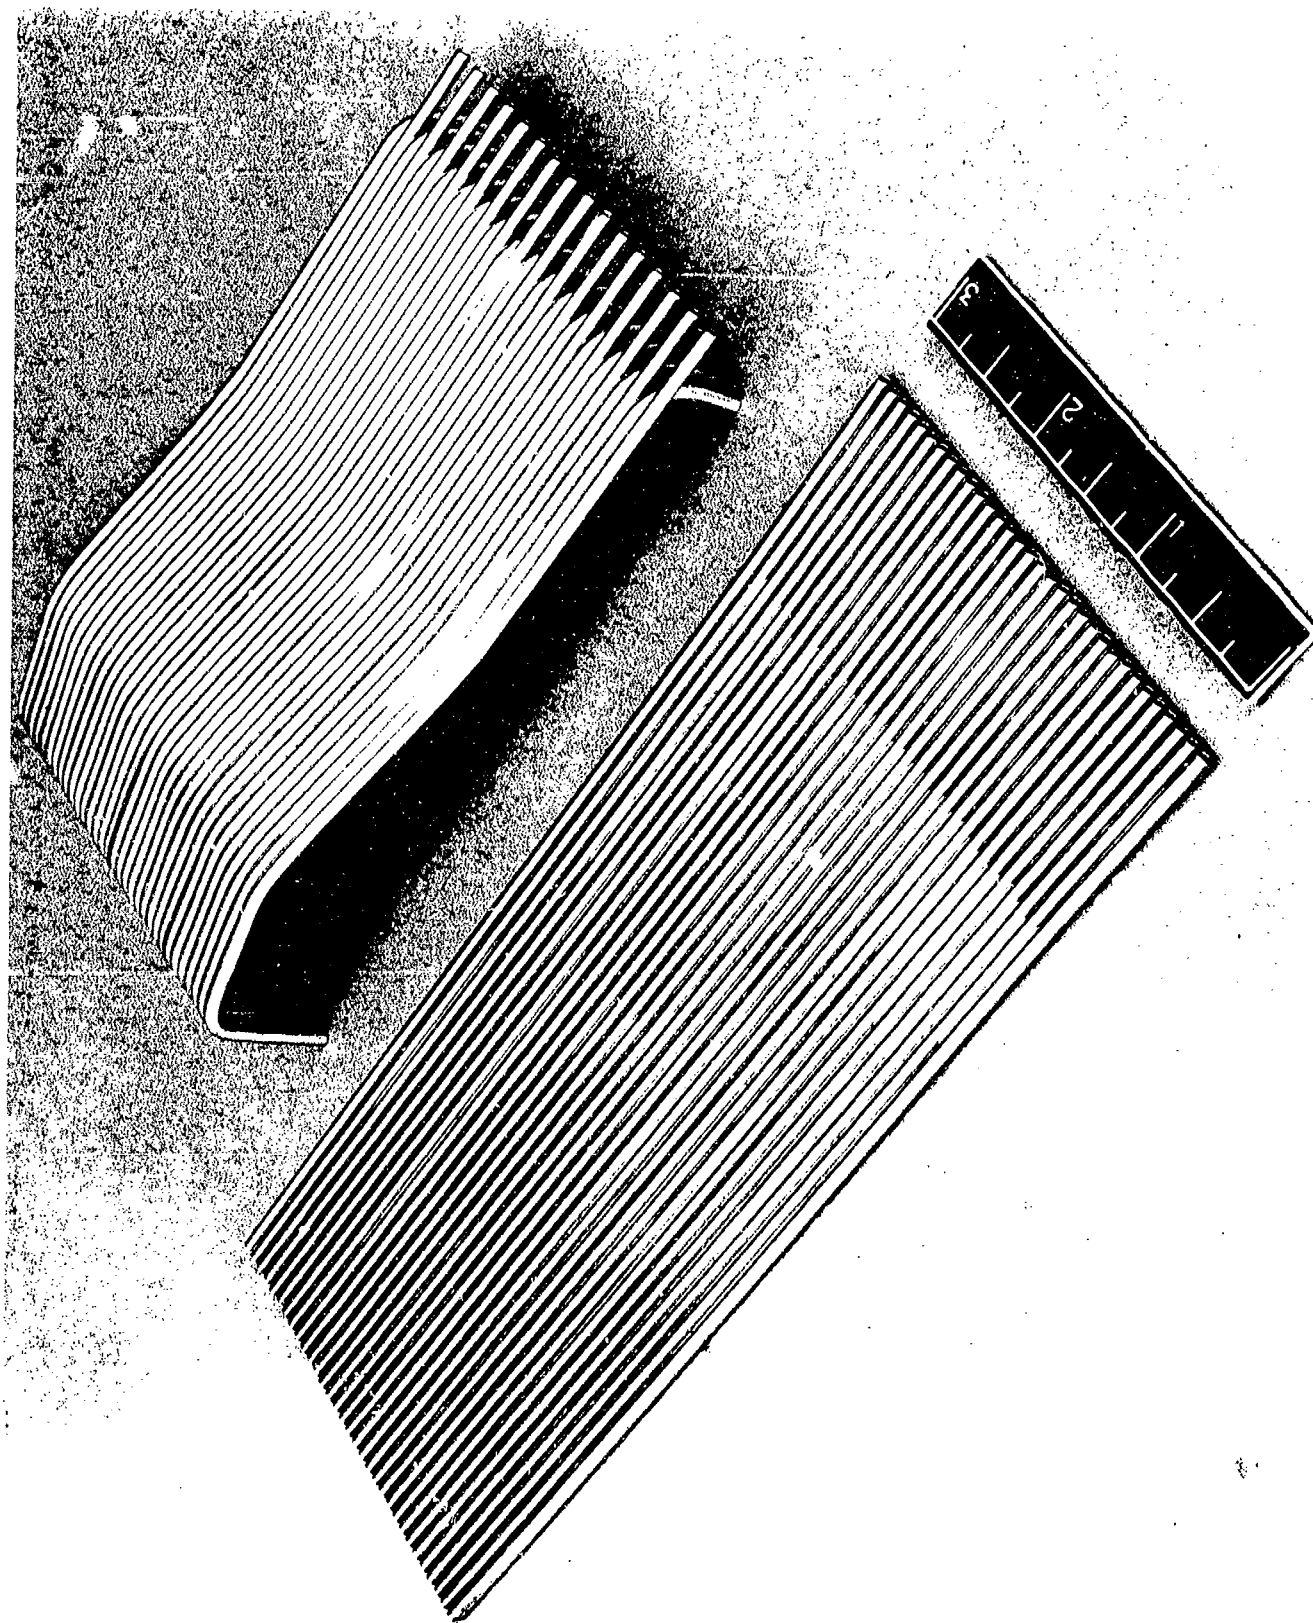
Sample EB-Welded Tube Blankets
